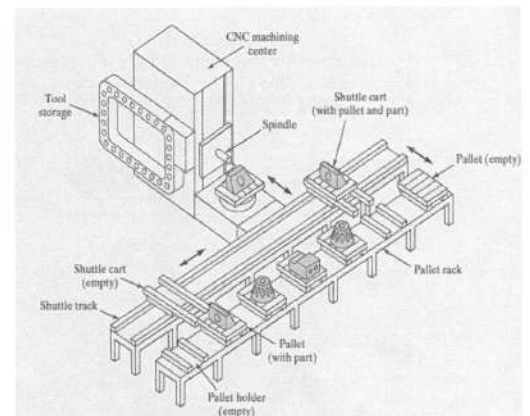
Single Machine cell consisting of one CNC machining center and parts storage unit.
